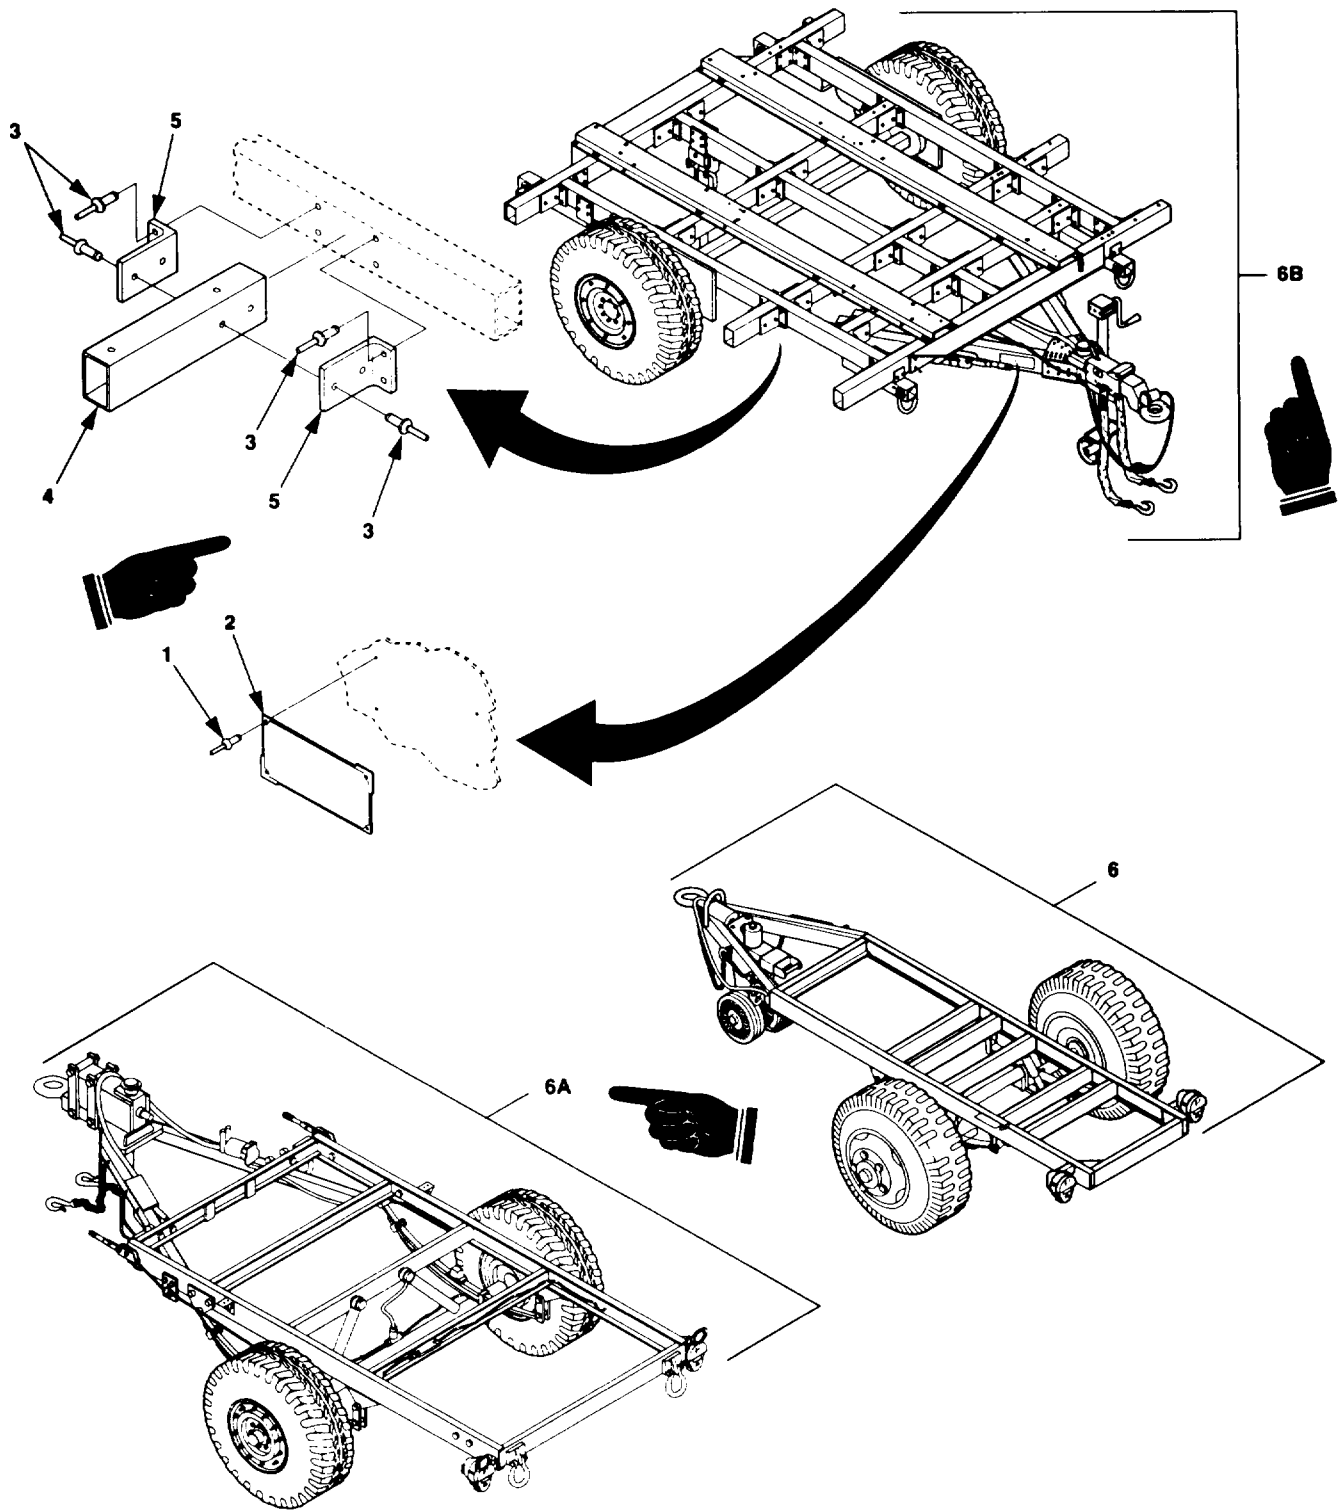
Power Plant/Power Unit Trailer Assembly.
